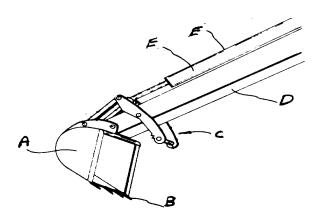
COMBINED WITH SHEAR; A - Vehicle; B - Hydraulic means for bucket; C - Bucket; D - Shears; E - Shears actuating means
